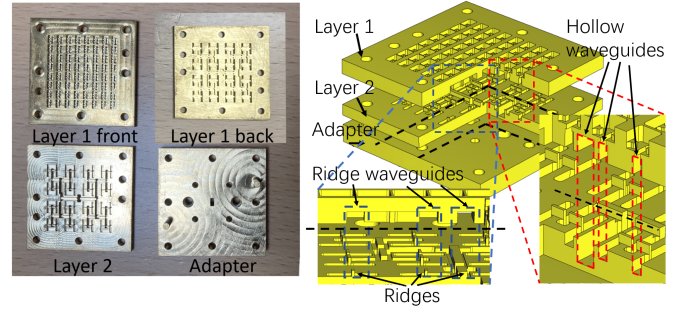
Photographs of the fabricated prototype in layers and its assembling method.
